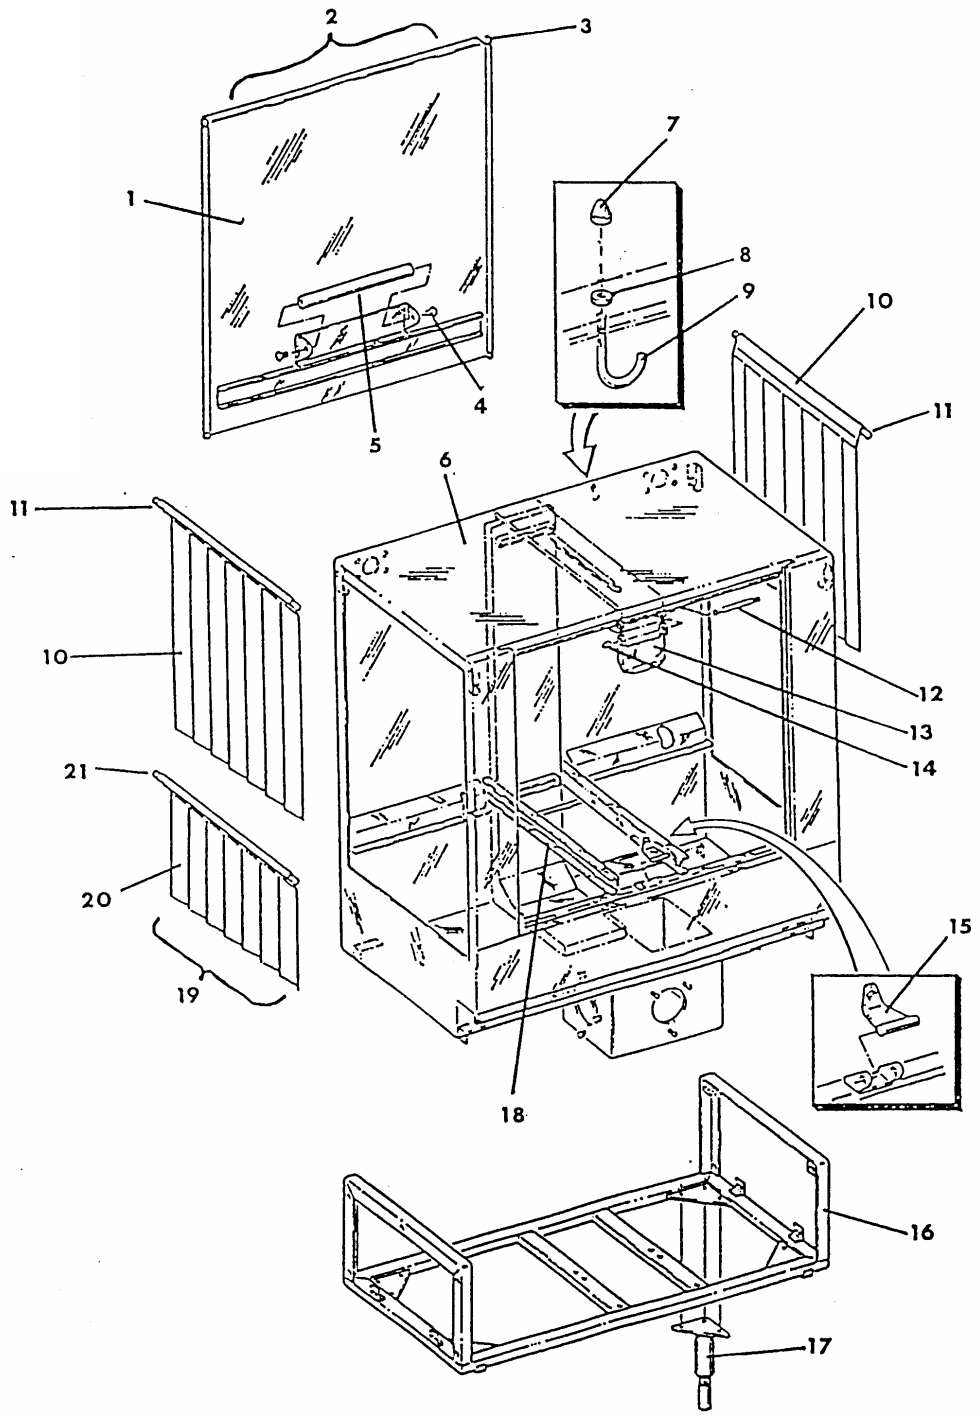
TANK WELDMENT, DOOR & SUPPORT WELDMENT
